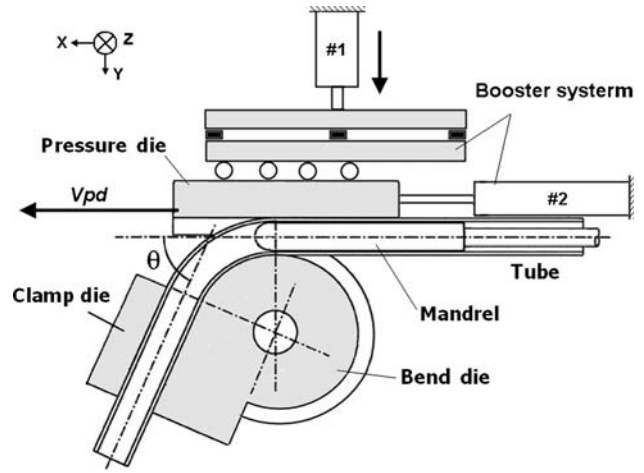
The schematic of rotary draw bending equipment with surface booster system
